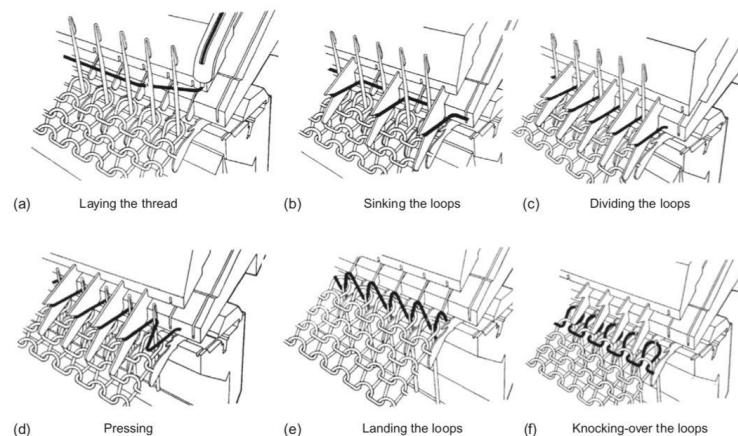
The manufacturing process of flat-bed knitting machine [77]
